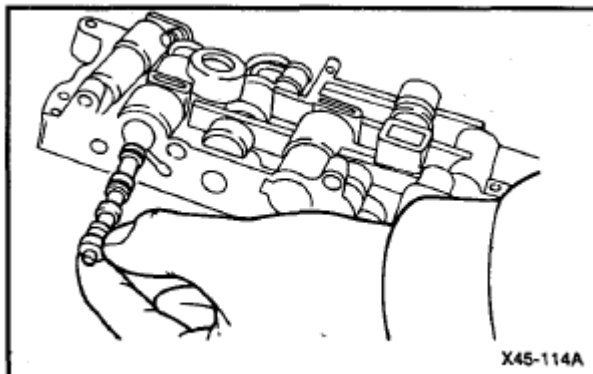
Removing/Installing Rear Clutch Exhaust Spring & Rear Clutch Exhaust Valves
